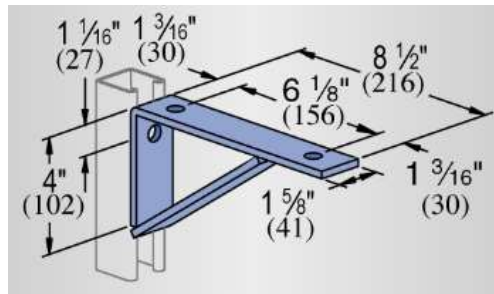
Bracket support for the pitched roof truss (P1769) (Unistrut 2017)
